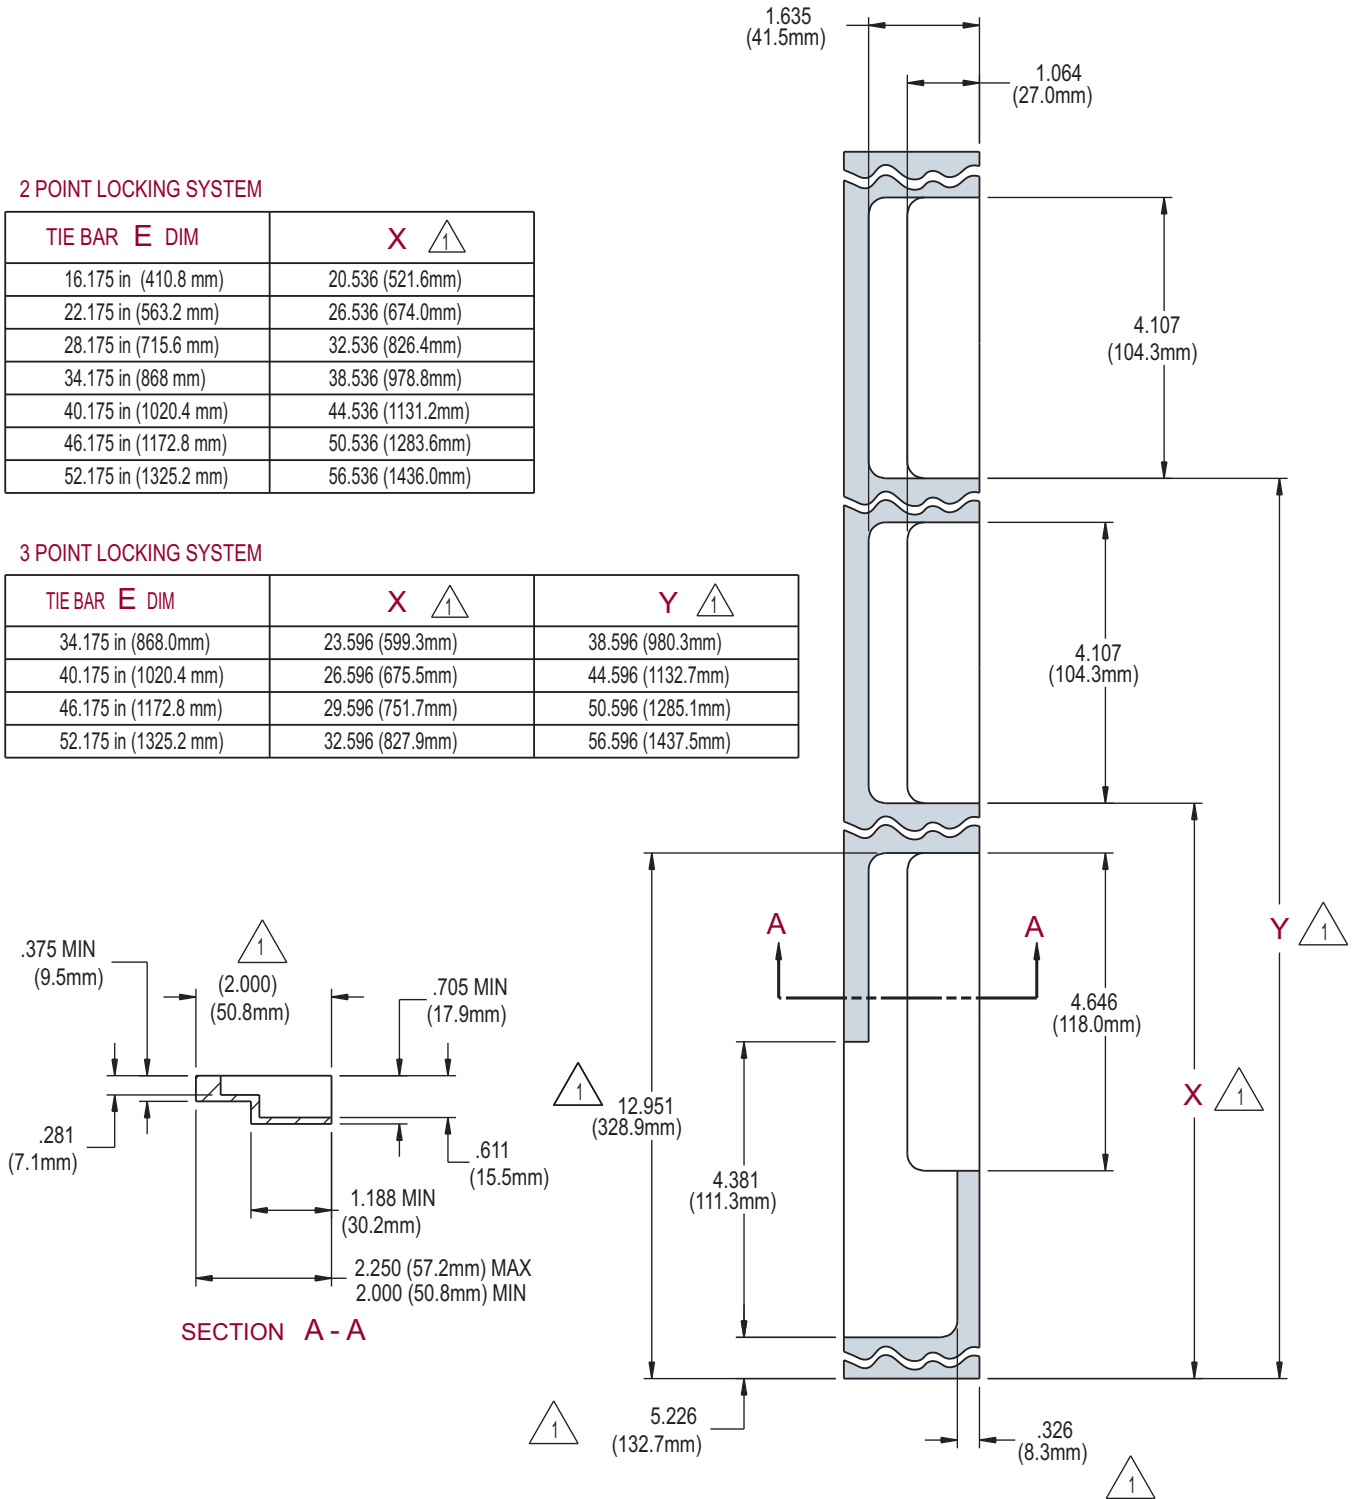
SIDE STOP ROUTING DETAIL (2 AND 3 LOCKING POINT)
